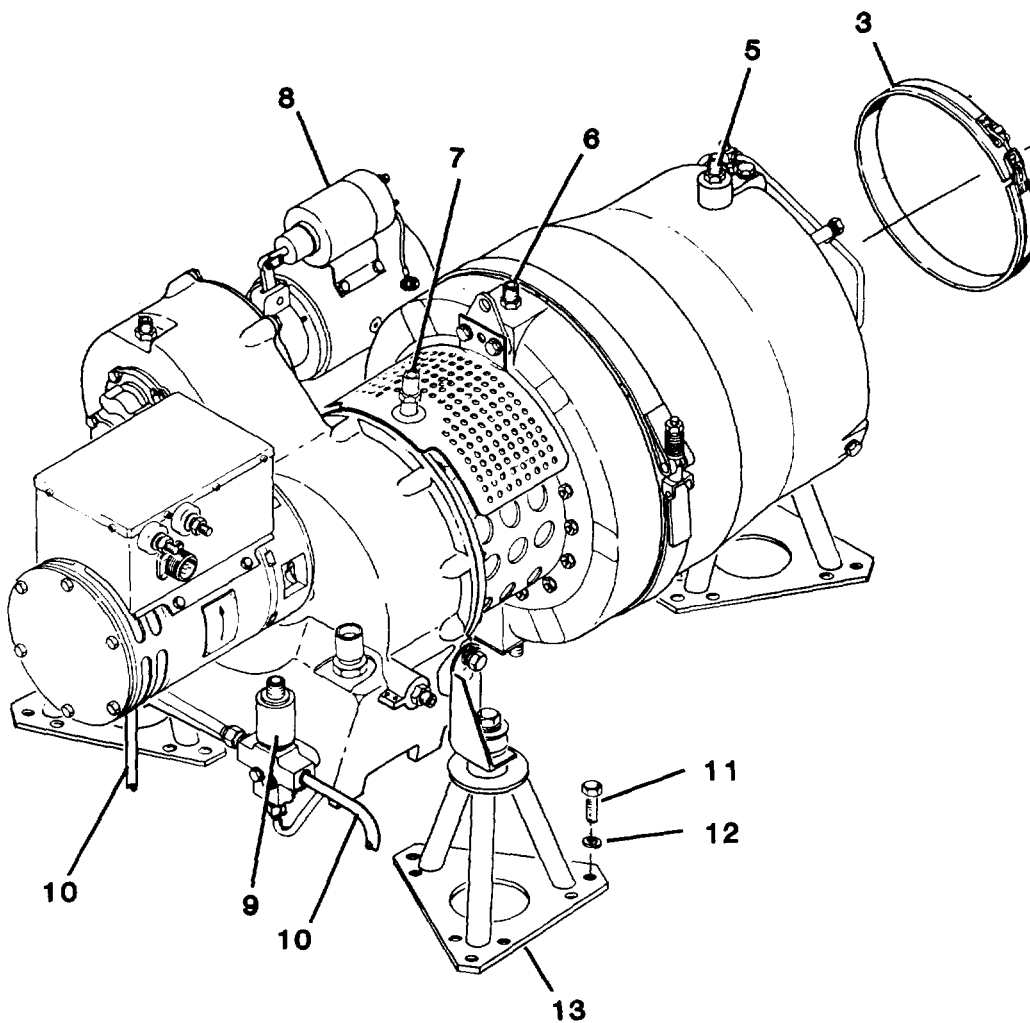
Engine and Gearbox Replacement (Sheet 2 of 3)
